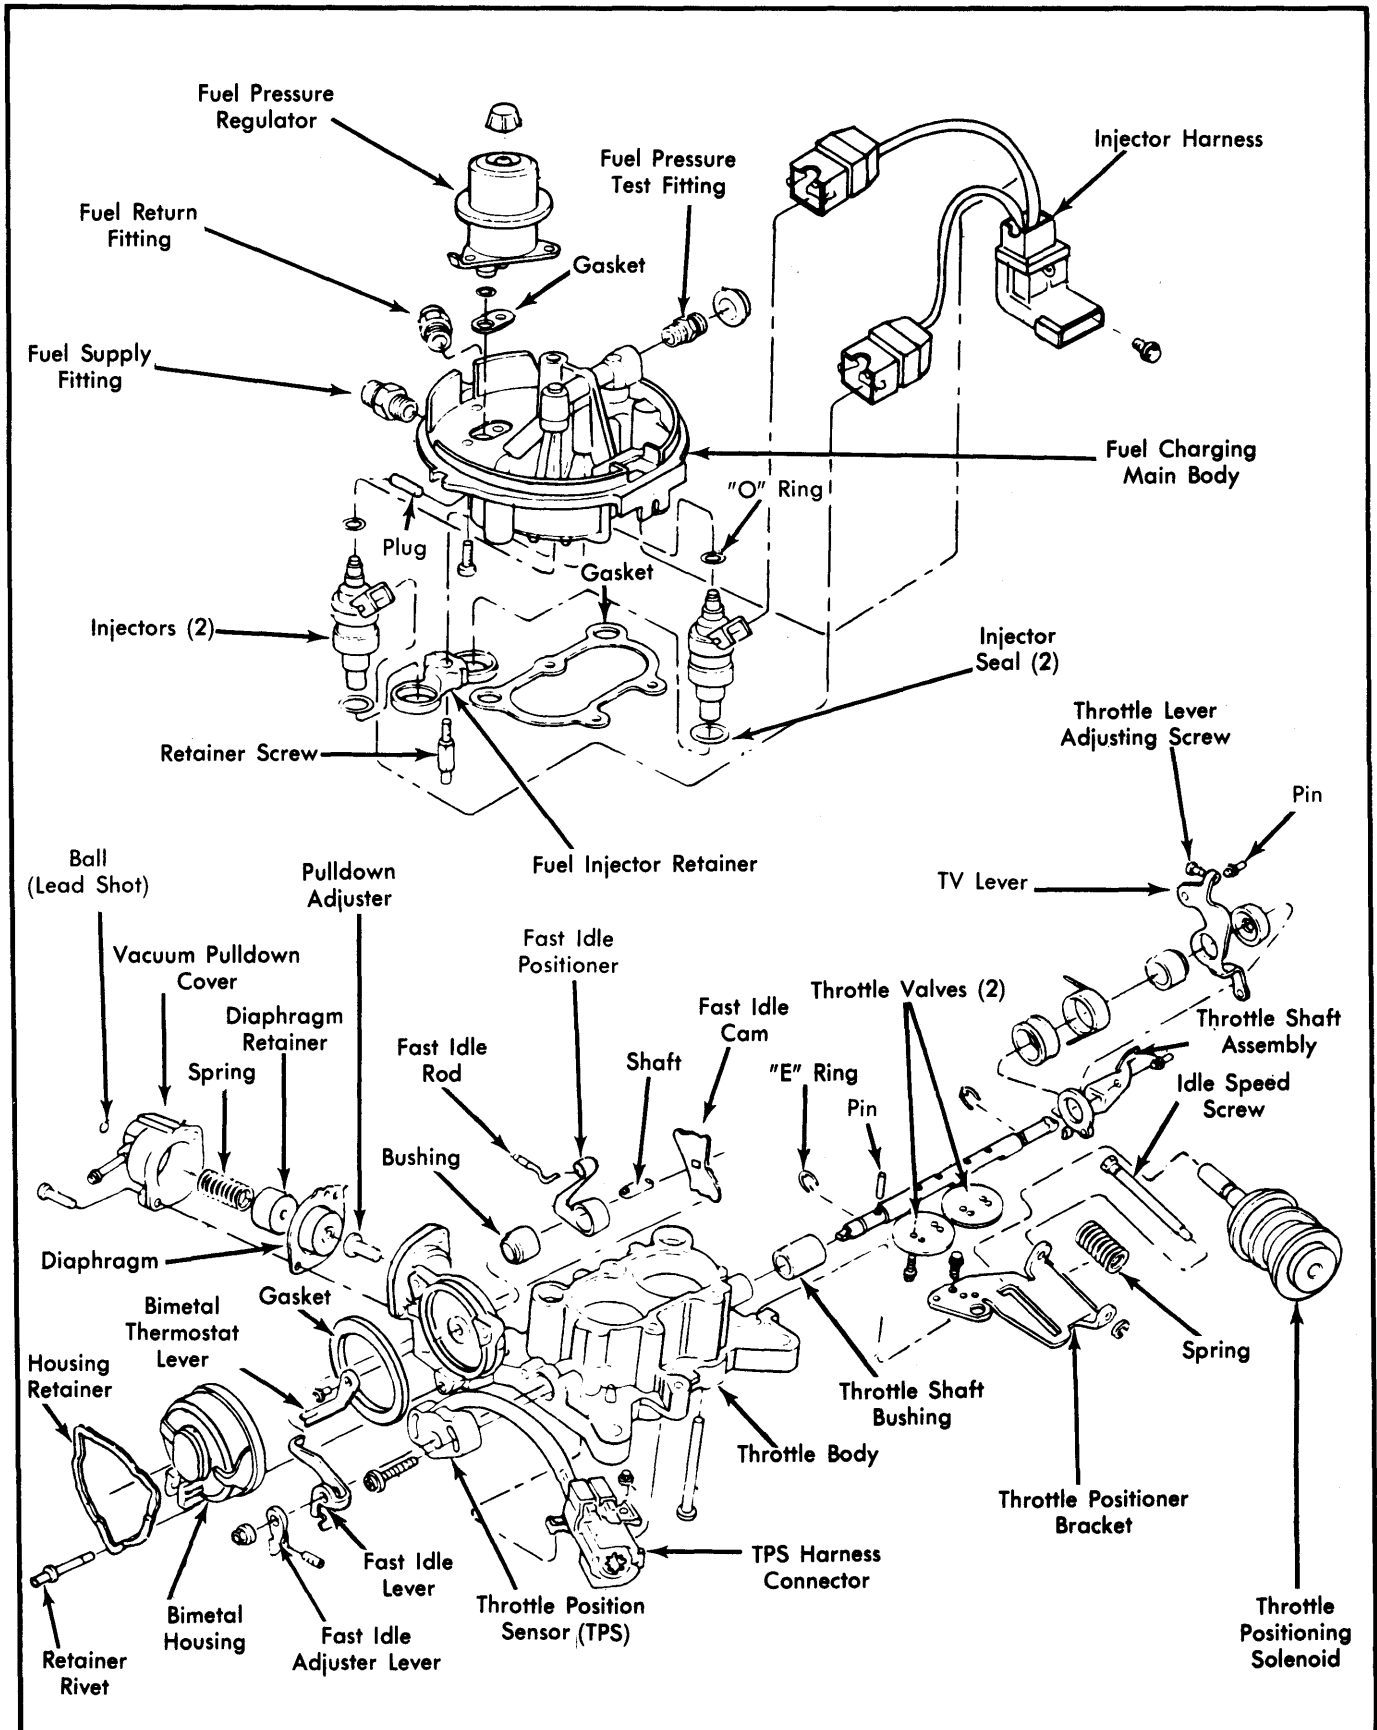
Exploded View of Throttle Body and Fuel Charging Assembly
